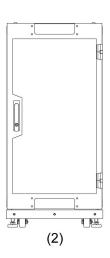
Outline drawing of the 19-inch rack Model 1624 (expansion/with stabilizer)
